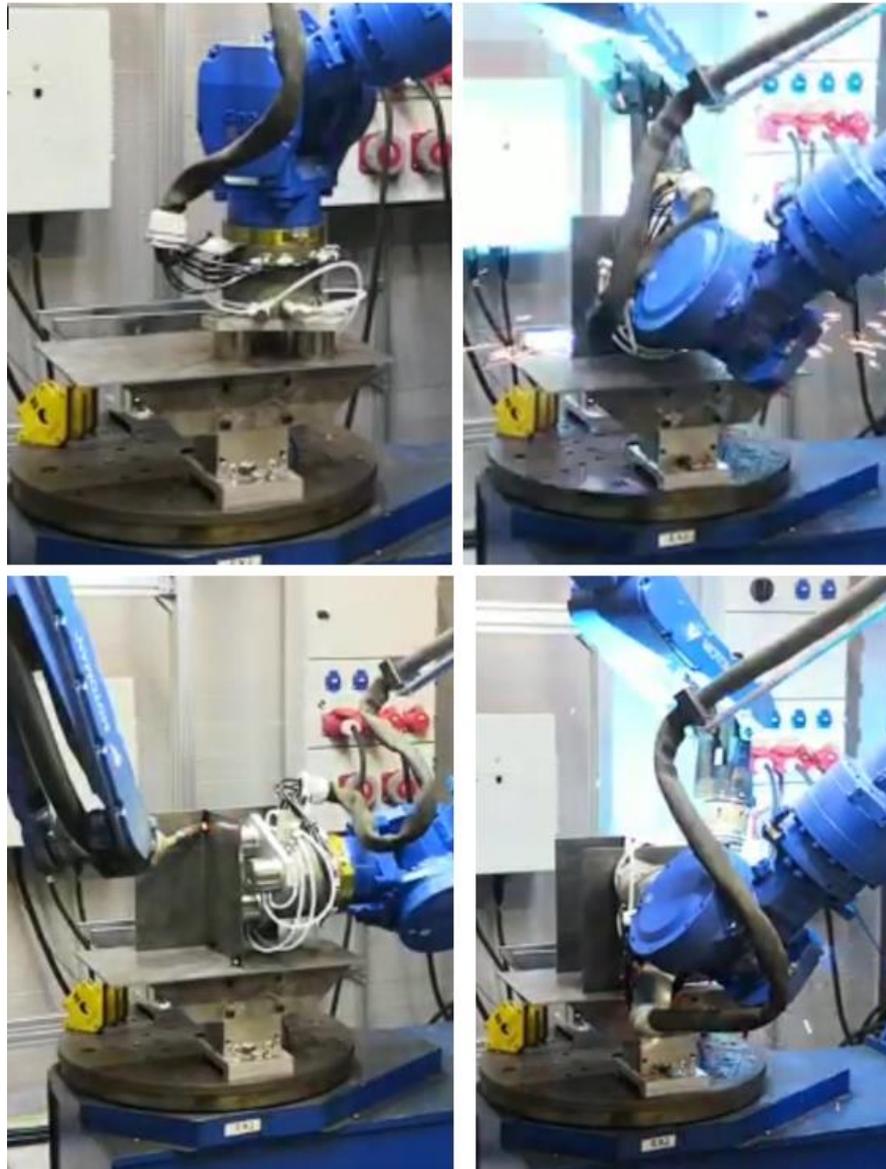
Preliminary testing of multi-robot jigless welding cell concept.
